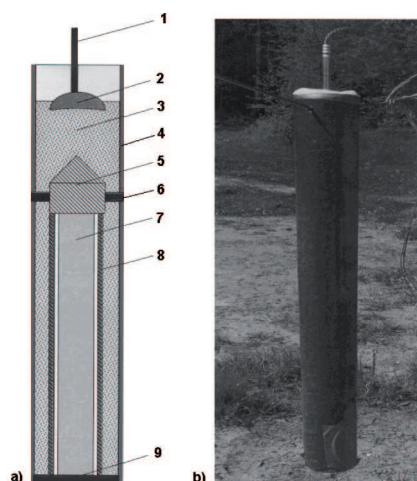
Schematic (a) and actual view (b) of systems used for explosive welding of bimetallic stock: 1 – detonator, 2 – primary explosive, 3 – loose explosive, 4 – PCV tube, 5 – centring plug, 6 – element aligning the system in the container, 7 – steel bar, 8 – corrosion-resisting steel pipe, 9 – bottom centring disk
